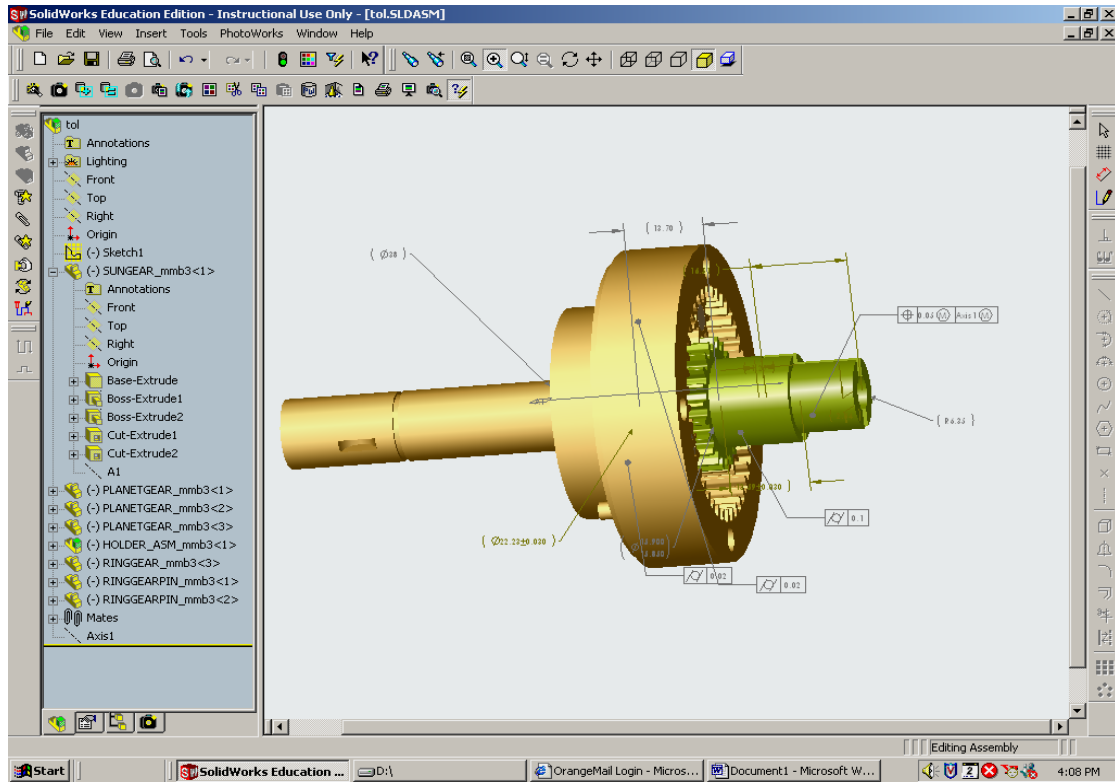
Tolerancing for the whole gearbox assembly
